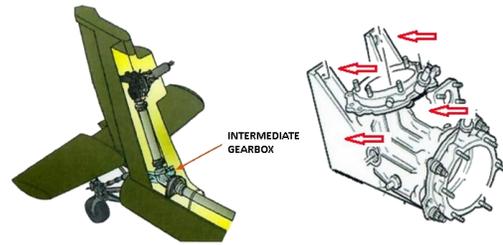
Intermediate Gearbox (IGB) of AH-64 and the corresponding locations of 4 bolts attaching the assembly to the airframe
